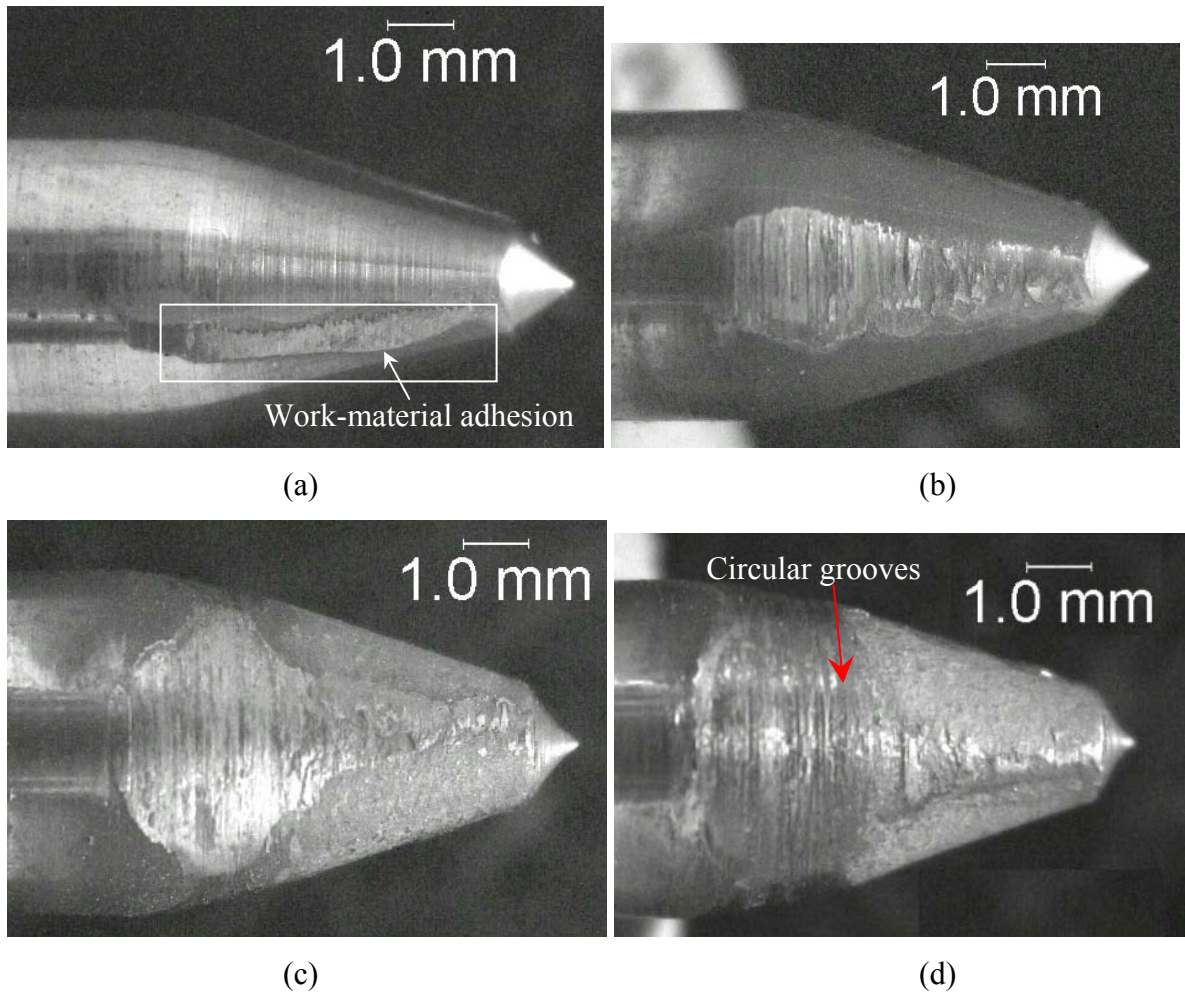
Optical micrographs of friction drilling tool after: (a) 2, (b) 1000, (c) 5000, and (d) 11000 holes.
